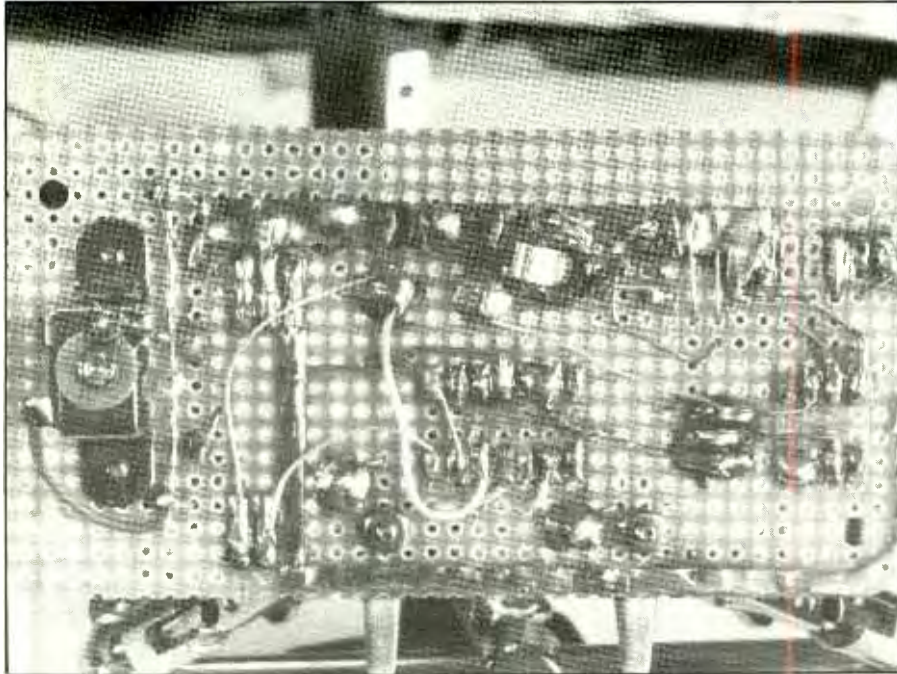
Wiring and soldering details of underside of board shown in Fig. 8. Note the wide copper foil conductors used for power distribution and self-stick pc-type patterns used for component mounting.
